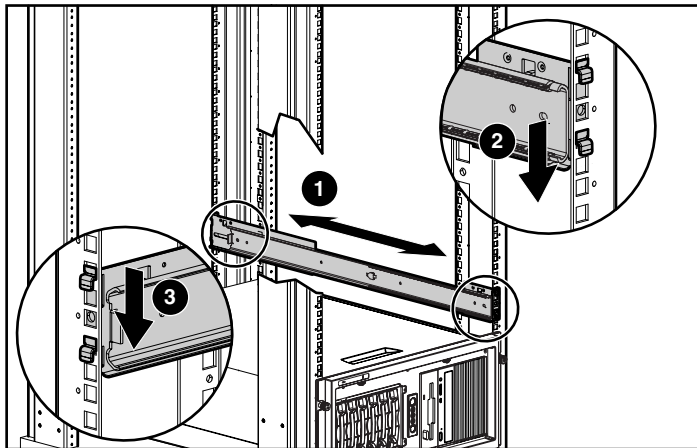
Securing the mounting bracket slide assembly to the rack
